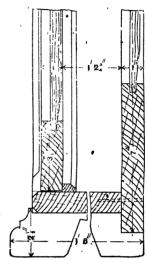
Enlarged Vertical Section through Bottom Part of Sideboard.
